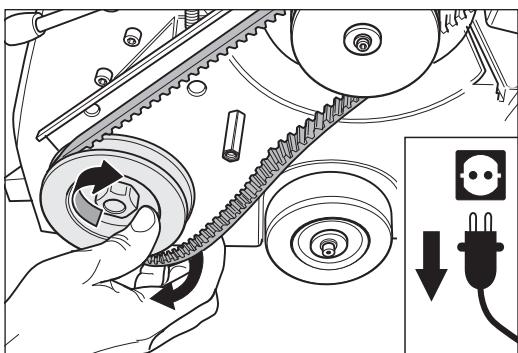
Allow the drive belt to run off the lower pulley. If necessary use the box wrench (see tool bag) to help you, but turn exclusively in the clockwise direction in order not to loosen the screw joint.
